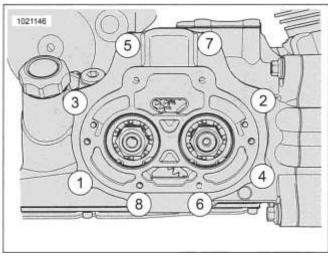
Transmission Bearing Housing Tightening Sequence
